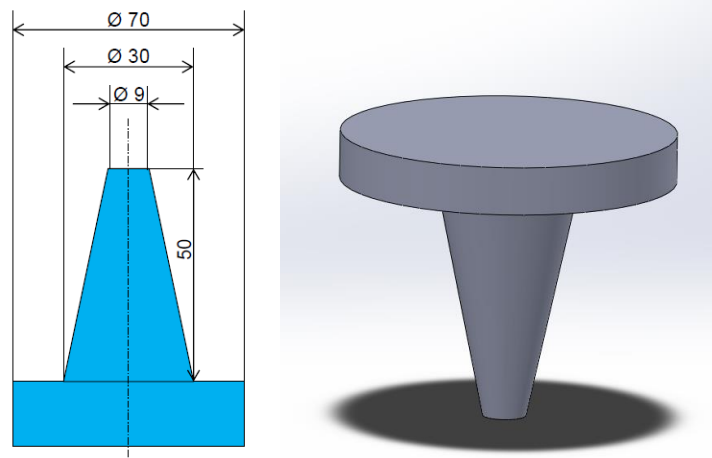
Simplified tool used in the concept test simulations, the dimensions are in mm.
